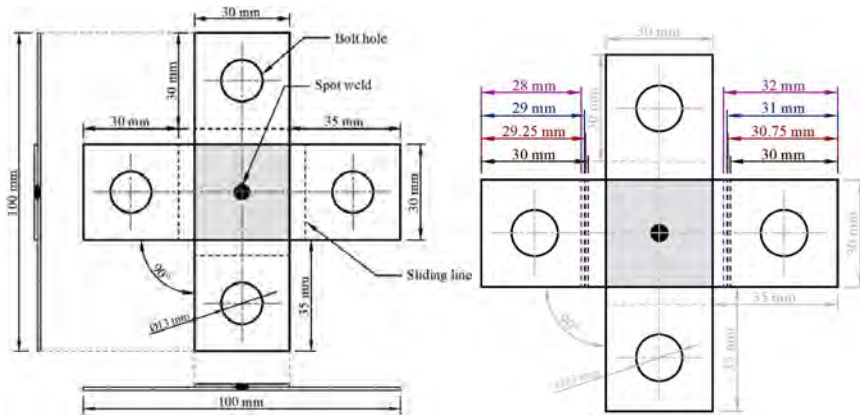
Cross-tension test standard sample geometry drawing on the left and sliding line displacement deviation sample geometry drawing on the right.
